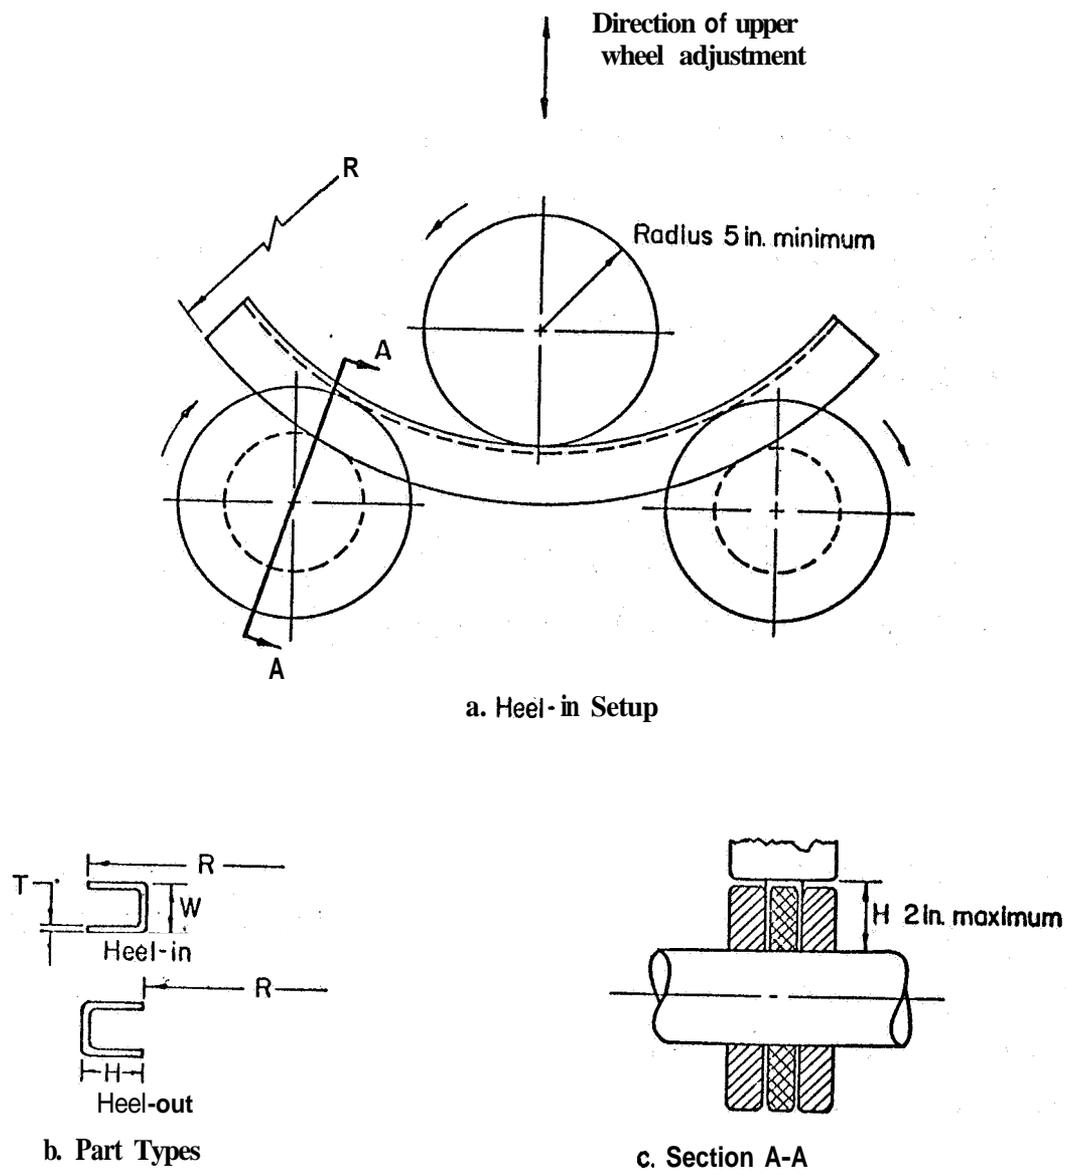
PART TYPES AND SETUP FOR ROLL BENDING (Ref. 69)
